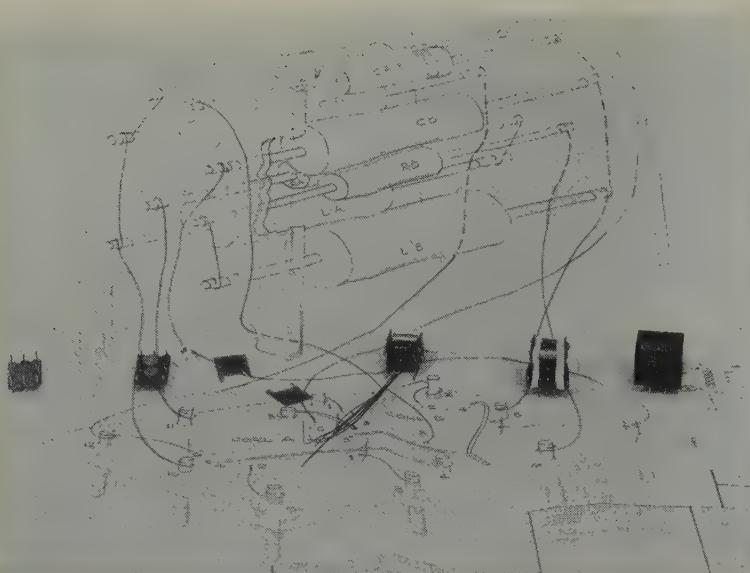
, this photograph illustrates the final method used for assembly of the two-bit shift register. Left to right: Transfer molded melamine terminal base; memory cores wired to terminal base; printed circuit side boards for other components; assembled component network; completely assembled register; and, extreme right, encapsulated register. Backdrop is isometric of original, experimental assembly.
